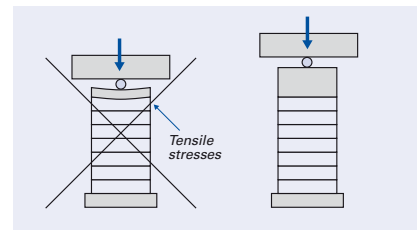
Proper dimensioning of the end pieces in the case of point contact
